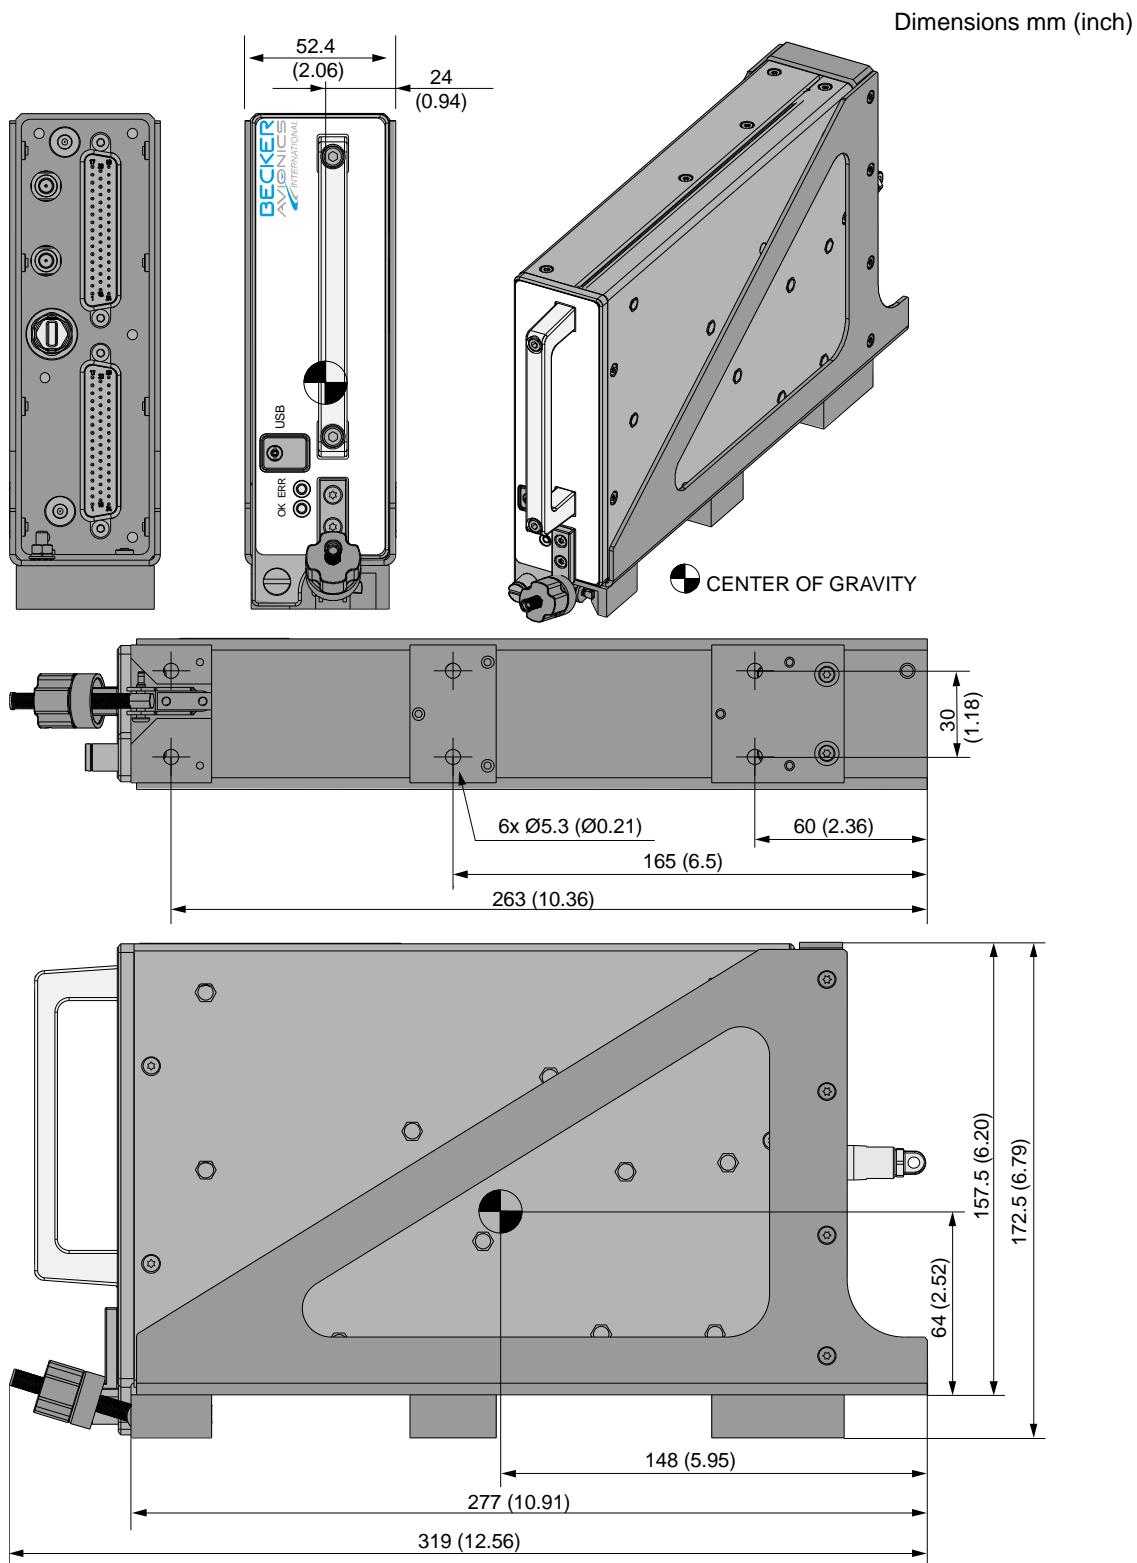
BXT6513-(0XX) with Mounting Tray MT6533
